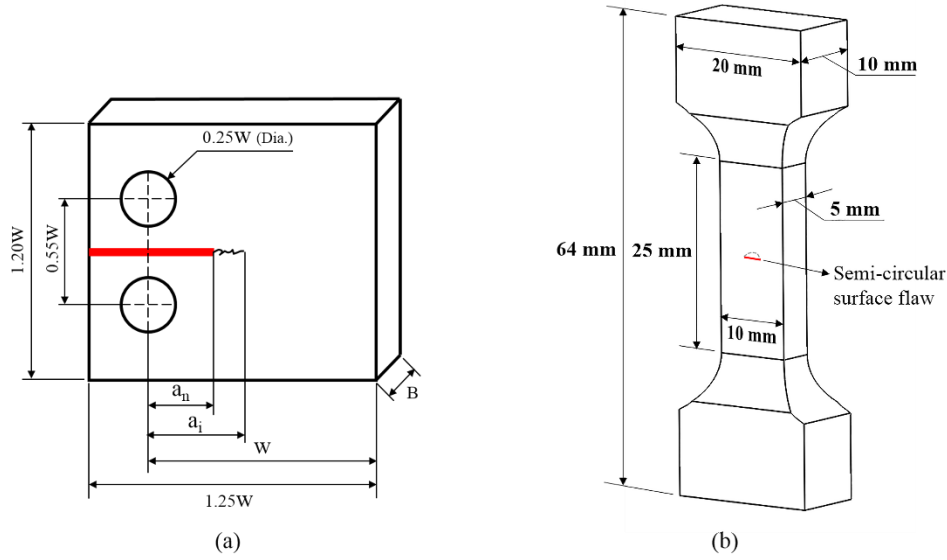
(a) ASTM E647 standardized compact tension specimen; (b) Surface flaw tension specimen.
